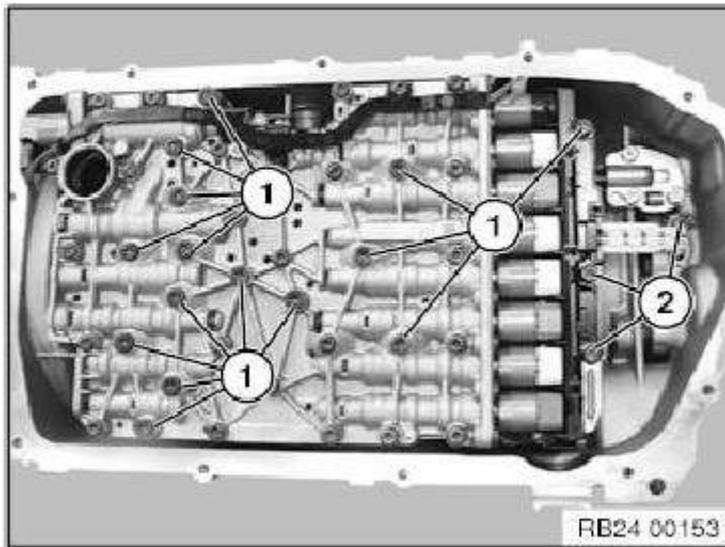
Identifying Mechatronics Unit Mounting Screws (For Vehicles With Oil Reservoir)
